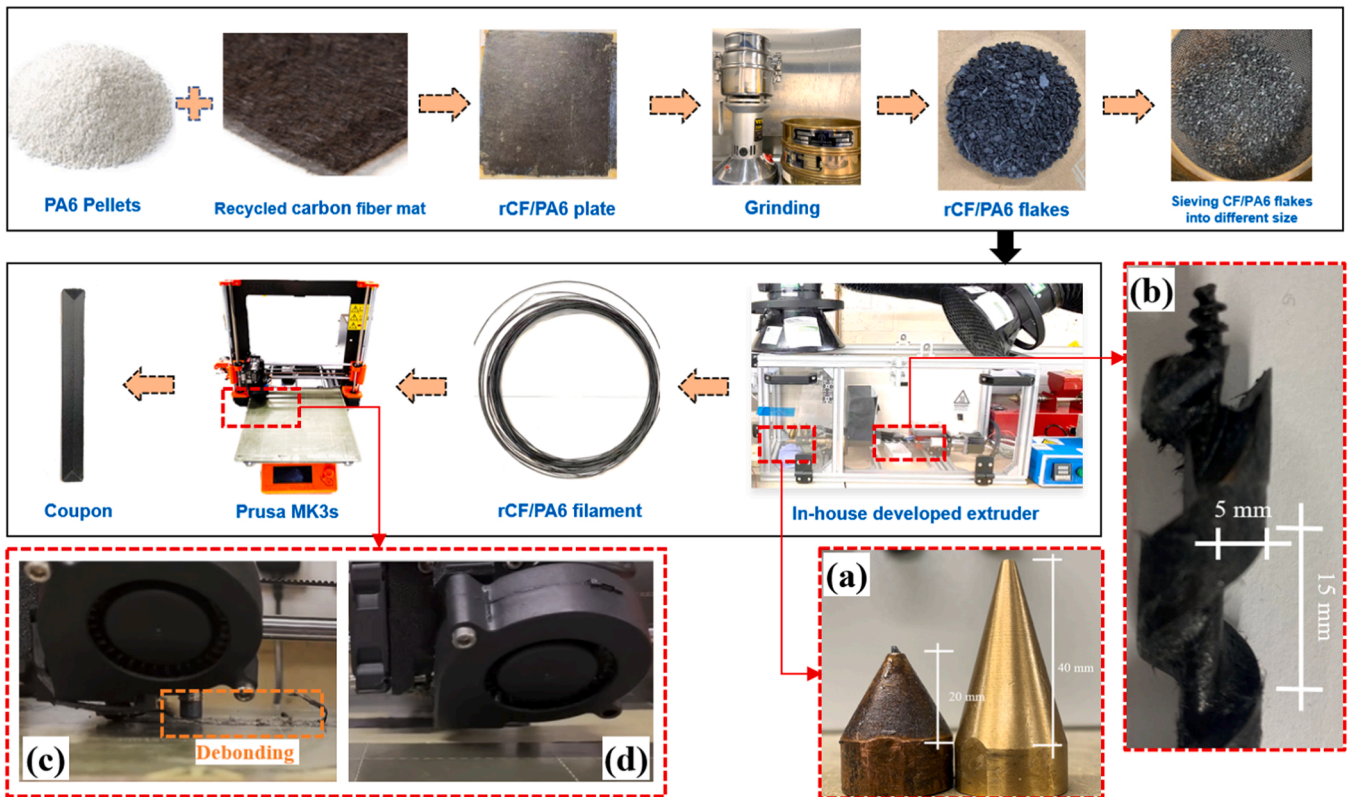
Flowchart of the experiment from virgin materials, through filament fabrication and printing, to mechanical tests: (a) original extruder nozzle (left) and modified extruder nozzle (right), (b) modified screw auger with deep teeth, (c) raster failed to stick to the bed during printing at 0.4 mm nozzle height, and (d) raster stuck to the bed at 0.3 mm nozzle height.
